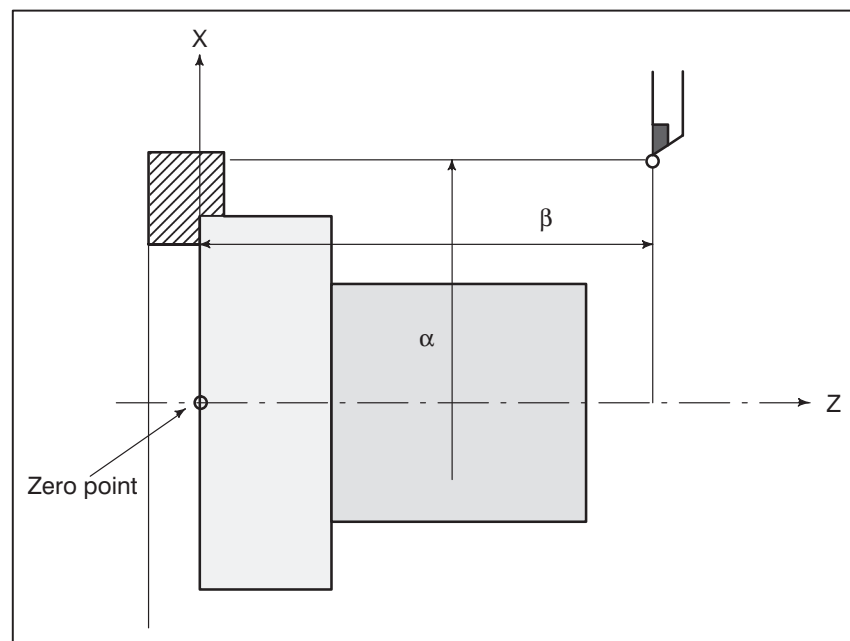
Tool Position Specified by $X\alpha Z\beta$
